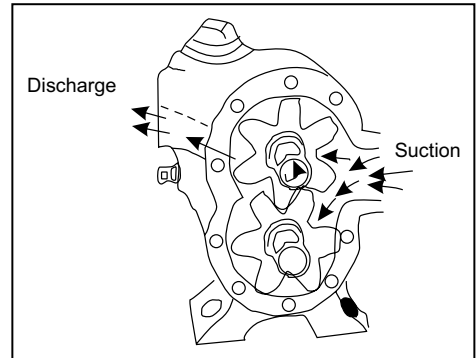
Sketch of spur-gear type rotary pump (open view) showing the principle of working
